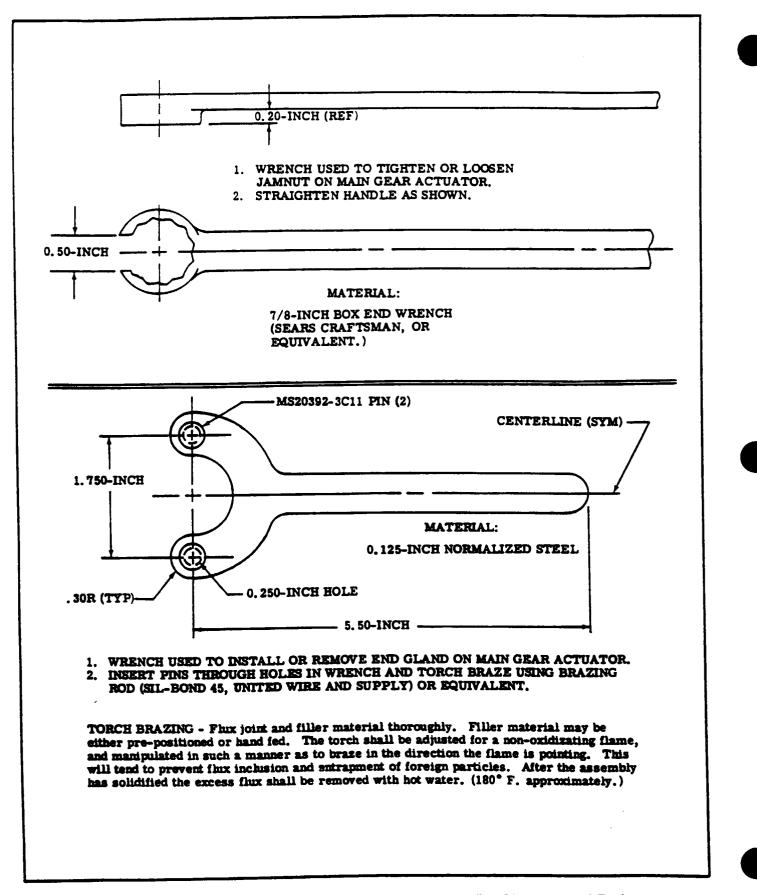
Fabrication of Main Landing Gear Actuator End Gland Removal Tool
